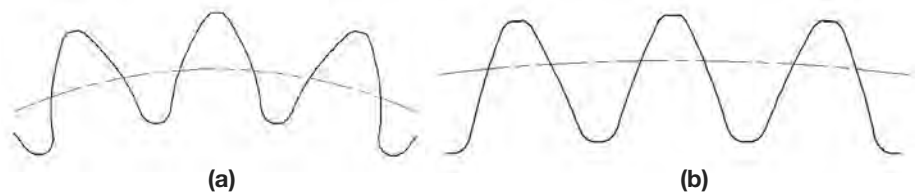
Symmetric gear tooth profiles; (a)—24-tooth pinion, (b)—83-tooth gear.
